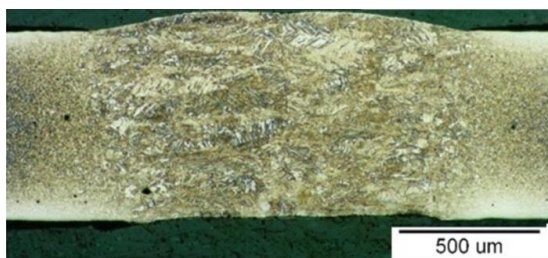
Macrostructure of laser weld of dual-phase HCT600X.
